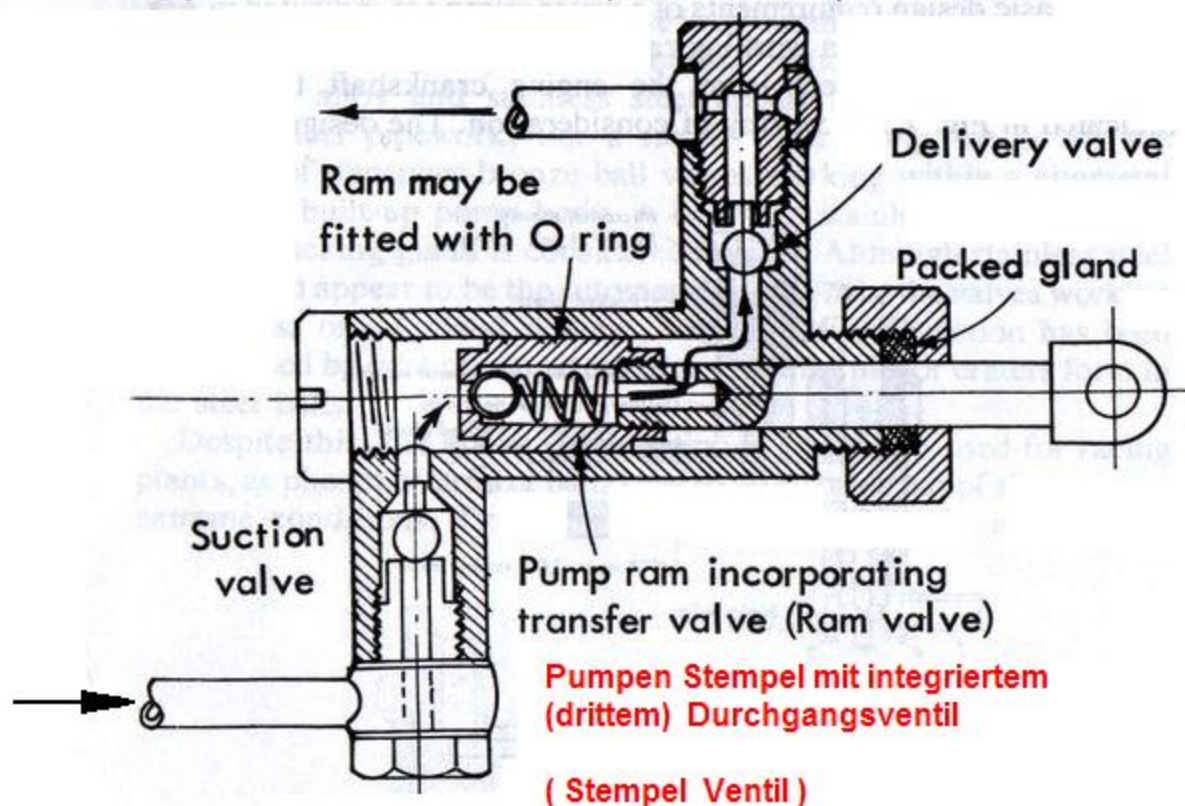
Uniflow boiler feed pump shown full-size. Water enters the pump through the pipe at the bottom
